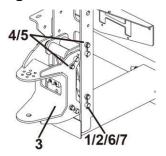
Assembling the swing motor mounting bracket 1. Transition support pin 2. Adjusting washer 3.
